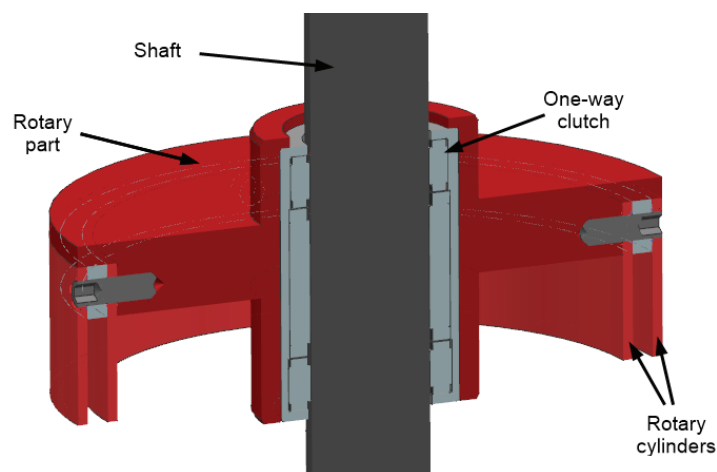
3D assembly model of the rotary part and the shaft with one-way bearing.
